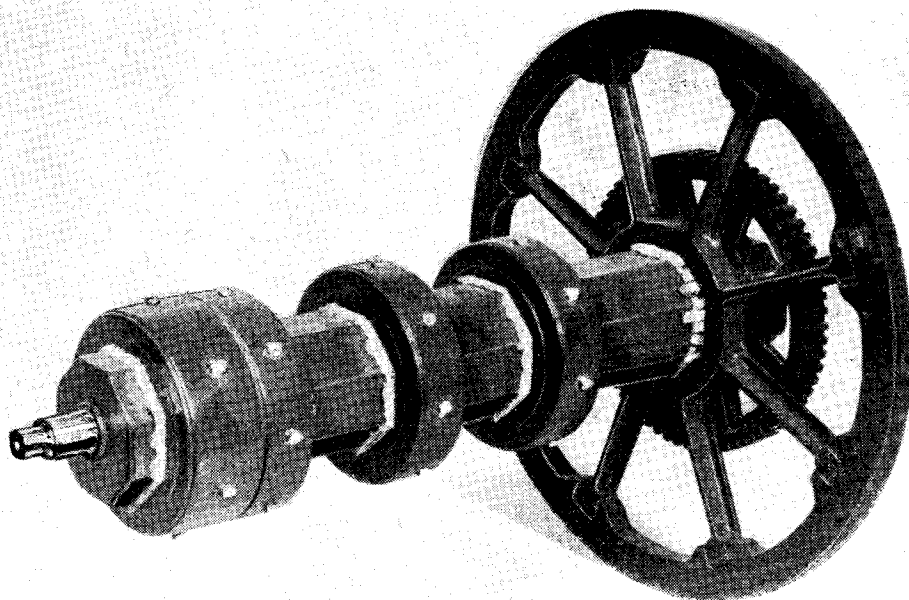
The model camshaft, complete with cam-rings, flywheel, and spur-wheel
